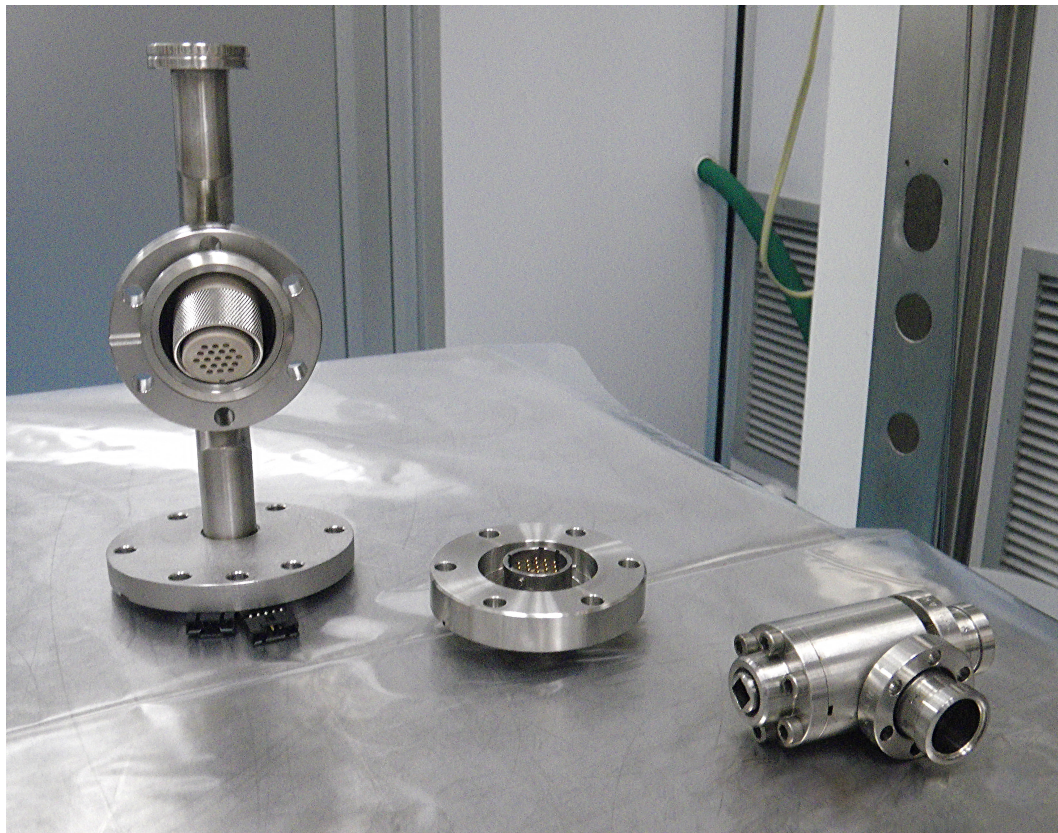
The instrumentation feedthrough weldment, instrumentation feedthrough, and all-metal angle valve for the DC Field Dependence Cavity.
